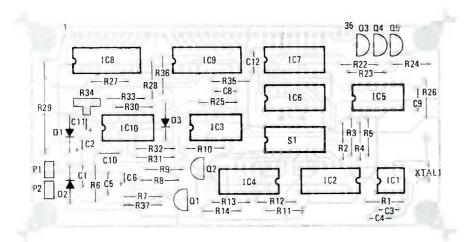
STUFF THE MAIN BOARD as shown here, and, after checking both boards for errors, connect them together with 35 pieces of short bare wire. The solder sides of the board should face each other.
